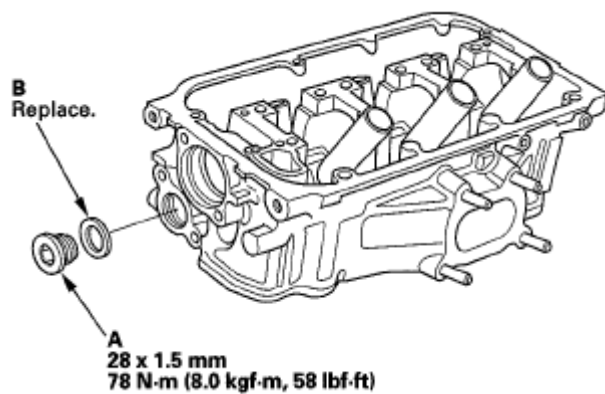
Identifying Sealing Bolt And Washer With Torque Specifications - Front
